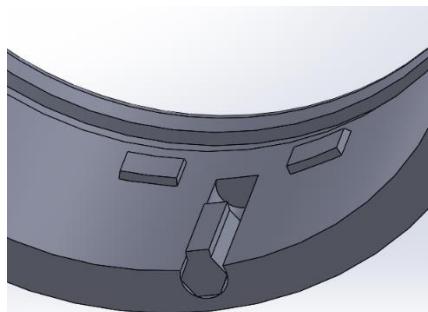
PCB stops and peg design - peg is to hold PCB in place against the stops
